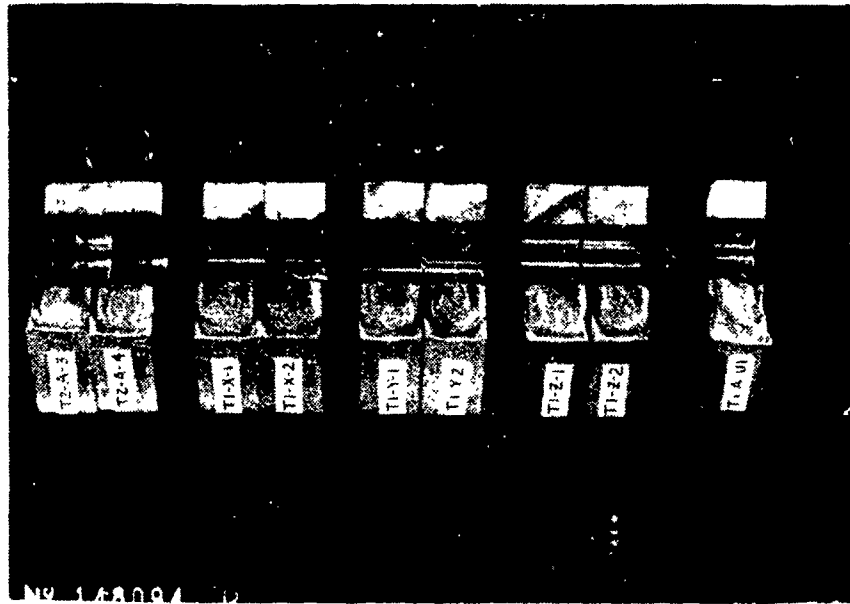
Fracture Surfaces for -45 Degree-Loaded Tapered Aluminum Lugs with Primary Fatigue Crack at 58 Degrees
